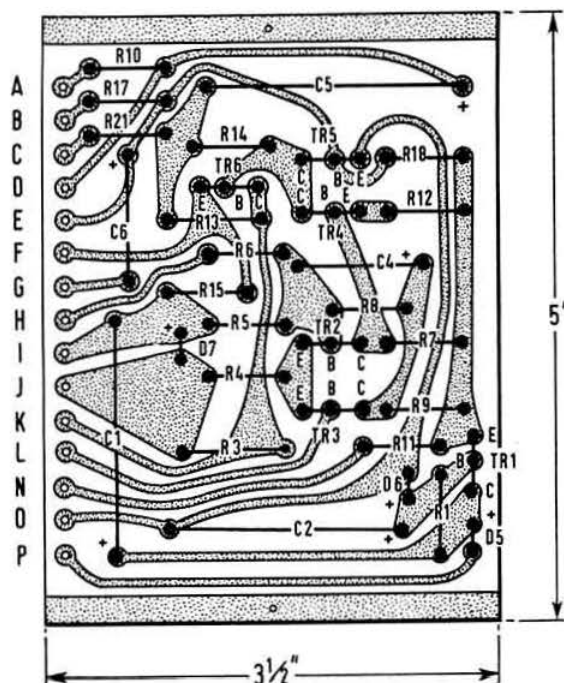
A component layout suitable where printed circuit or pin-board construction is to be used.
